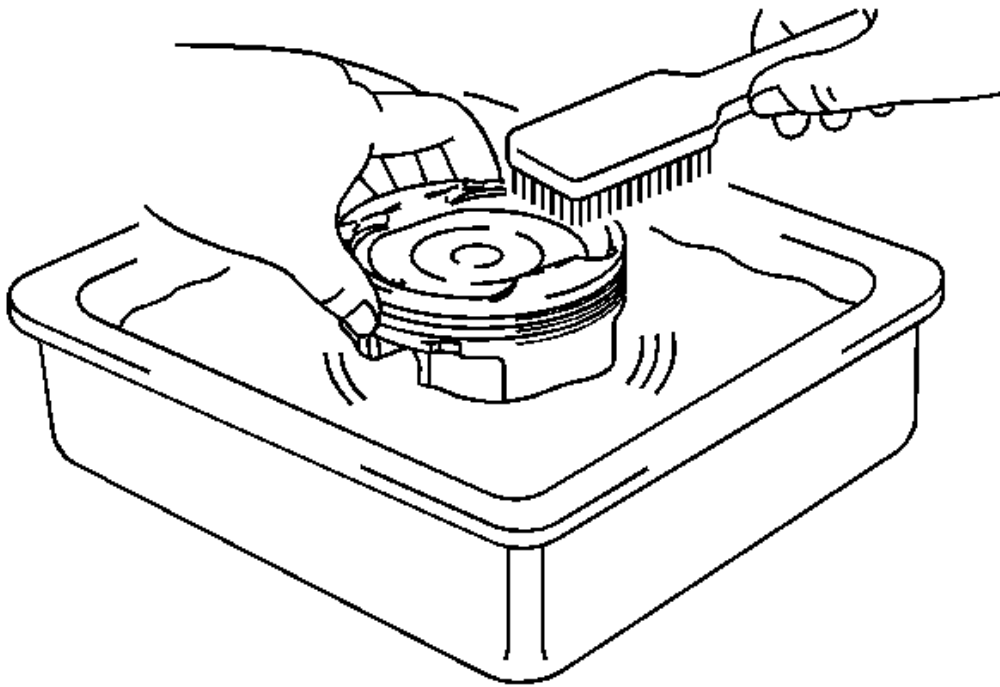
View Of Cleaning Piston With Brush & Solvent
